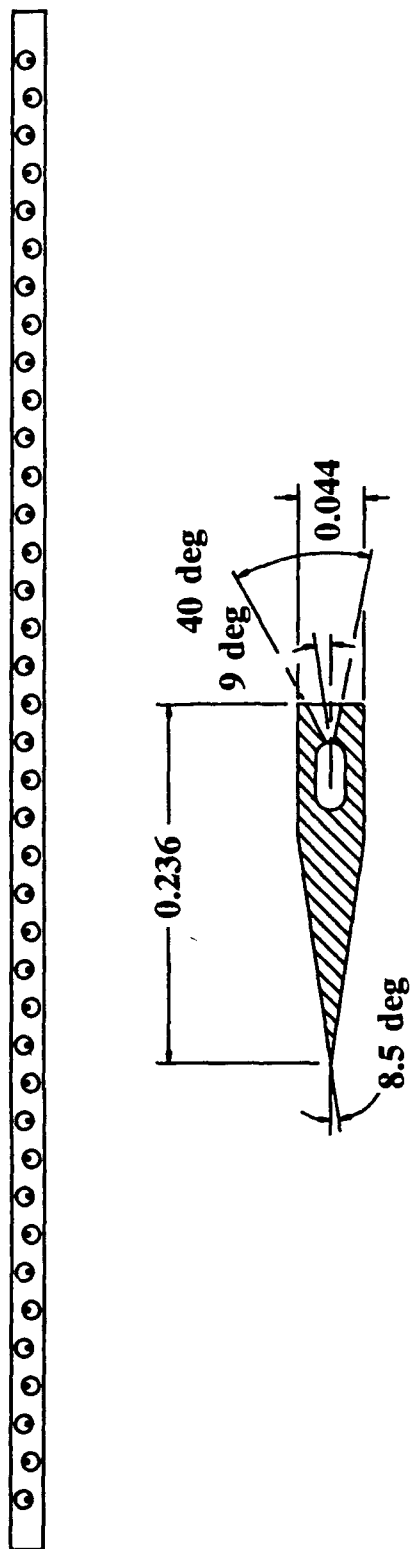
Drawing of fast mixing nozzle. Upper view shows injection nozzles head on. Lower view shows cross section. All dimensions are in inches.
